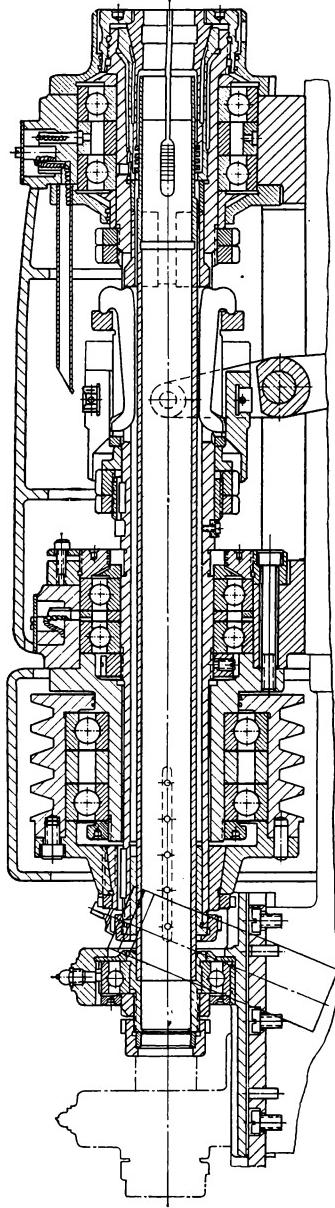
Chucking device of the model 1A136 automatic screw machine
